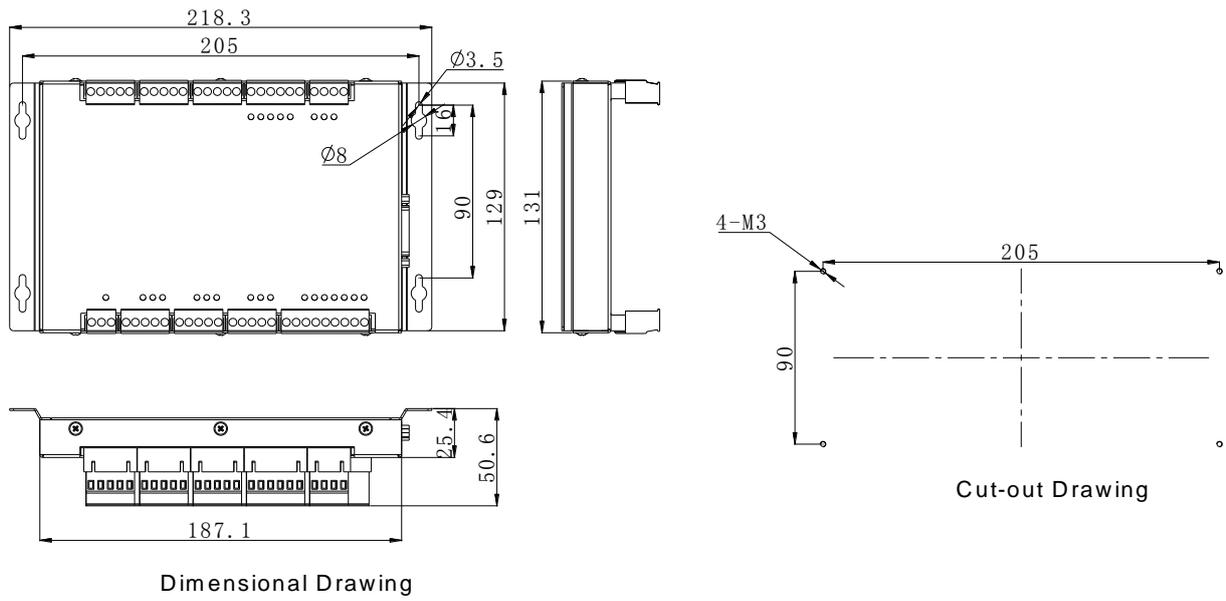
Dimensional drawing and cut-out drawing of NK105G2/G3 control box
